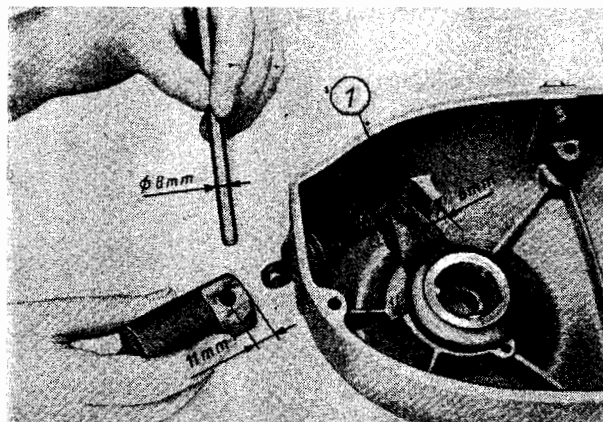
Coarse adjustment of the clutch actuation mechanism
